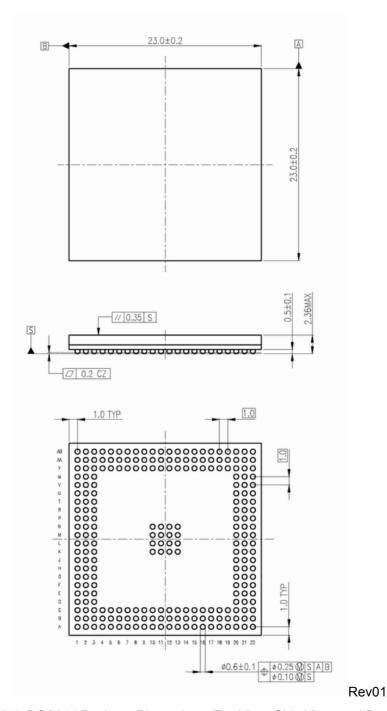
BGA244 Package Dimensions: Top View, Side View, and Bottom View
